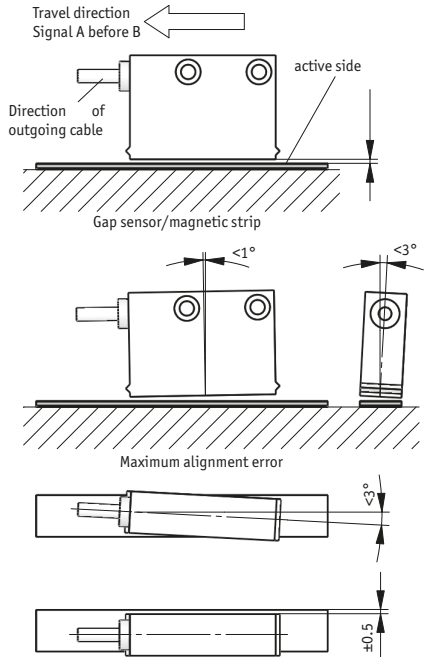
Definition of the counting direction with magnetic strip and assemblage sensor/magnetic ring, gap measure, tolerances
